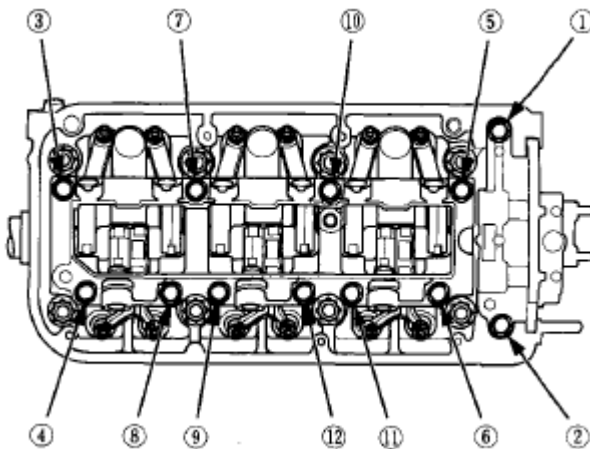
Identifying Bolts On Rocker Arm Assembly (Rear) With Loosening Sequence
